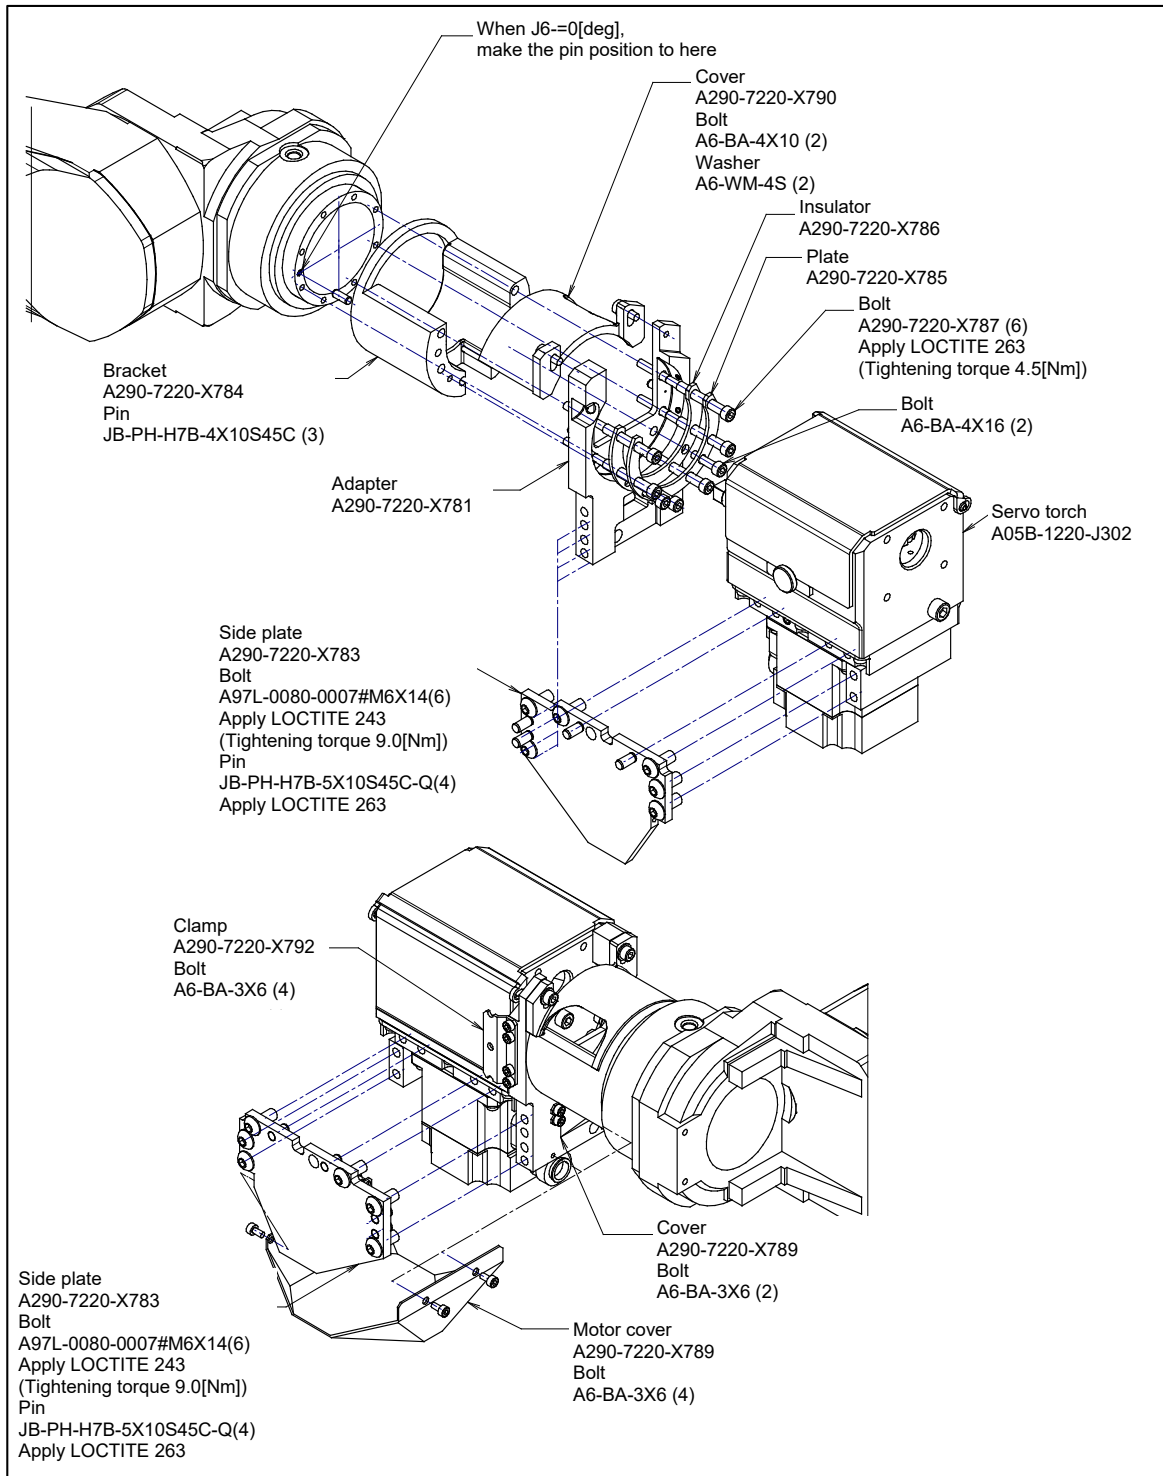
(b) Servo torch for mild steel installation (Bracket assembly spec. A05B-1220-J323)
